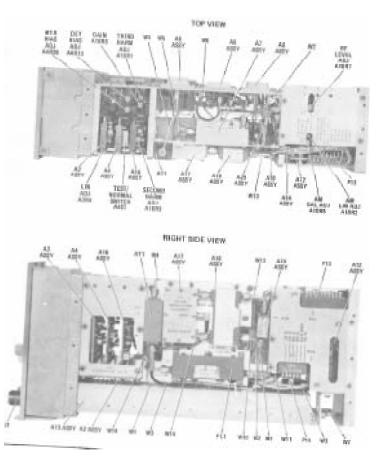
Assemblies, Chassis Parts, and Adjustable Component Locations
